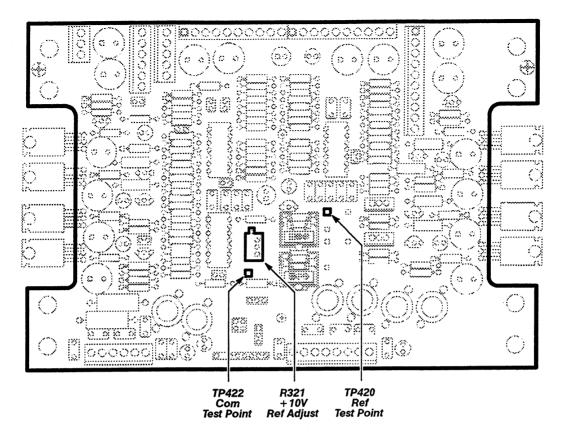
A4 Regulator Board Test Point and Adjustment Locations
